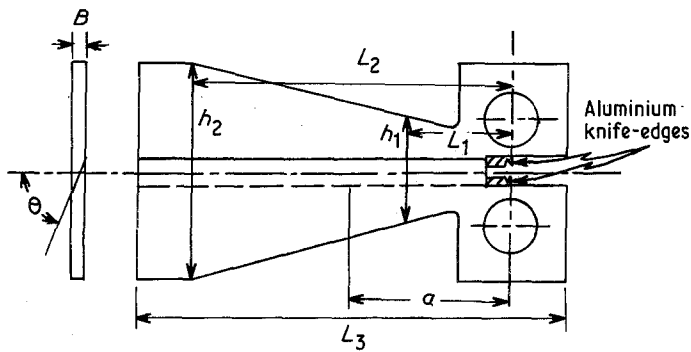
Dimensions of test specimen ($m = 1.18 \text{ mm}^{-1}$; 30 in^{-1}).
